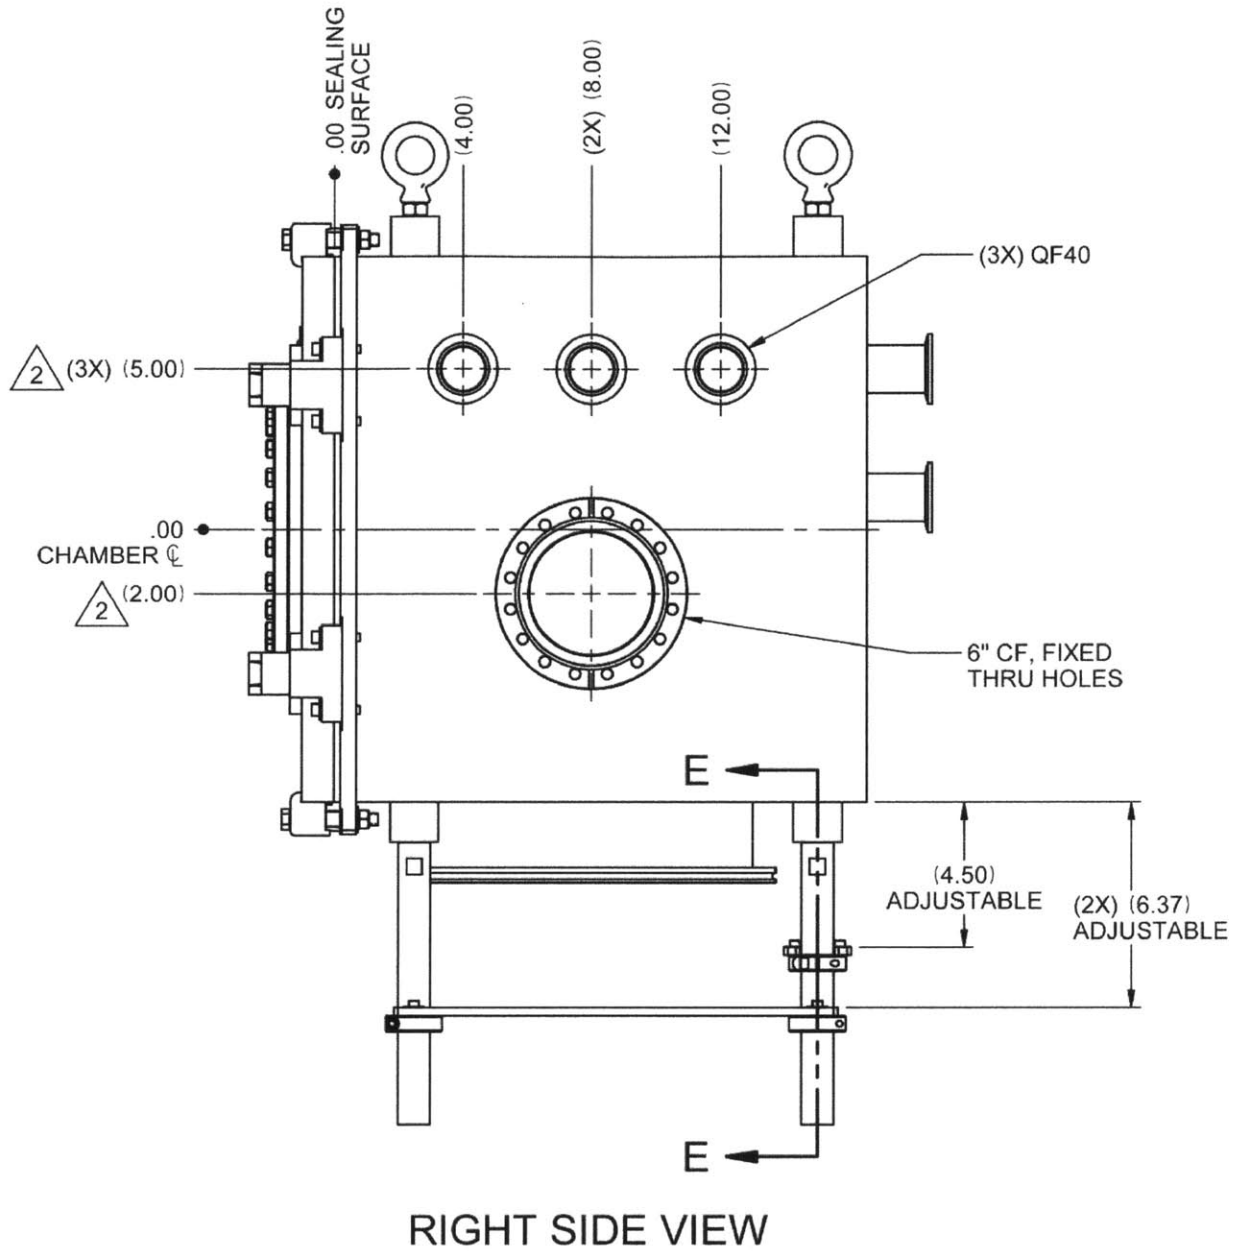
oCVD reactor chamber engineering drawing—right view. Dimensions in inches.
